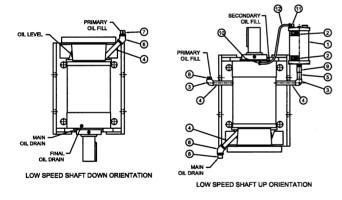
Vertical Service Shaft Orientations (C-Face or IEC Reducers)
